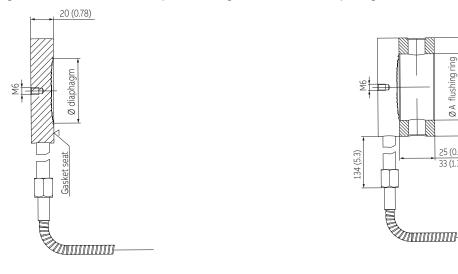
S26WA, S26WE Model Wafer remote diaphragm sealASME and EN 1092-1 Form B1 smooth and serrated (flushing ring as option)
